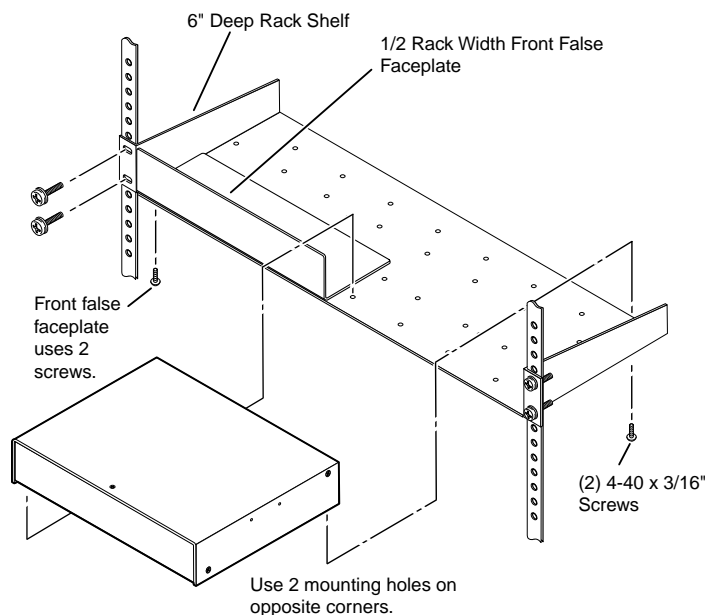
Mounting the switcher unit on a 6-inch deep rack shelf
